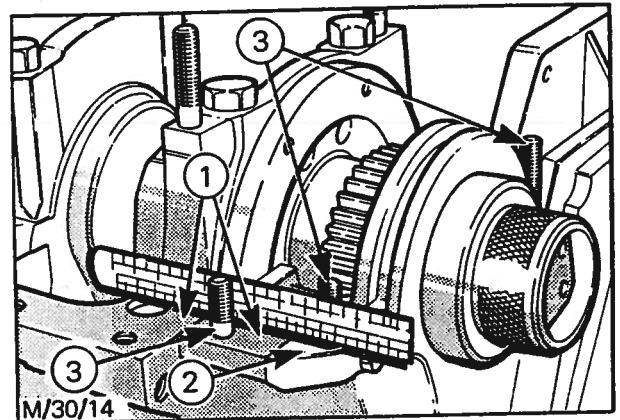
Timing Gear Housing and Cover Alignment (Left Hand Side on 2728T Engines)
